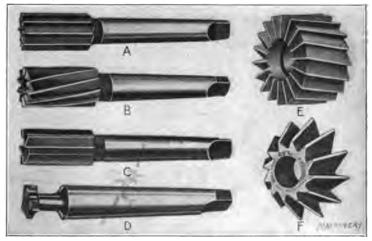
End Mills, T-slot Cutter, Shell End Mill, and Angular Cutter
